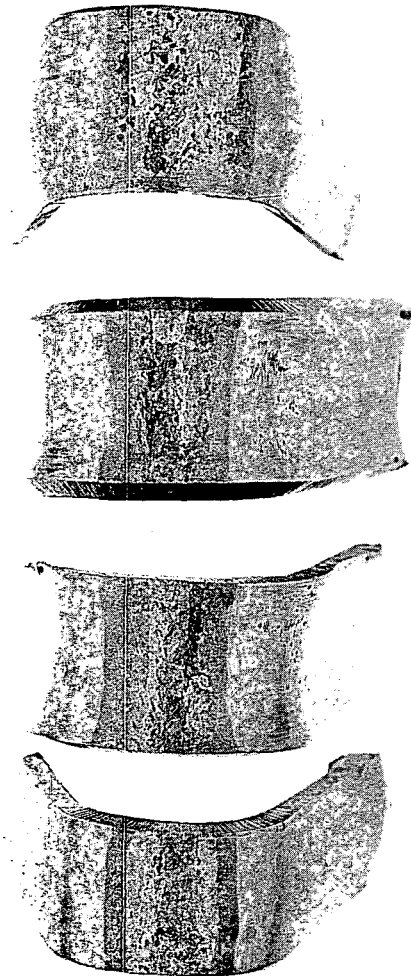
Appearance of Root and Face-Bend Samples from Titanium Weld Specimens.
